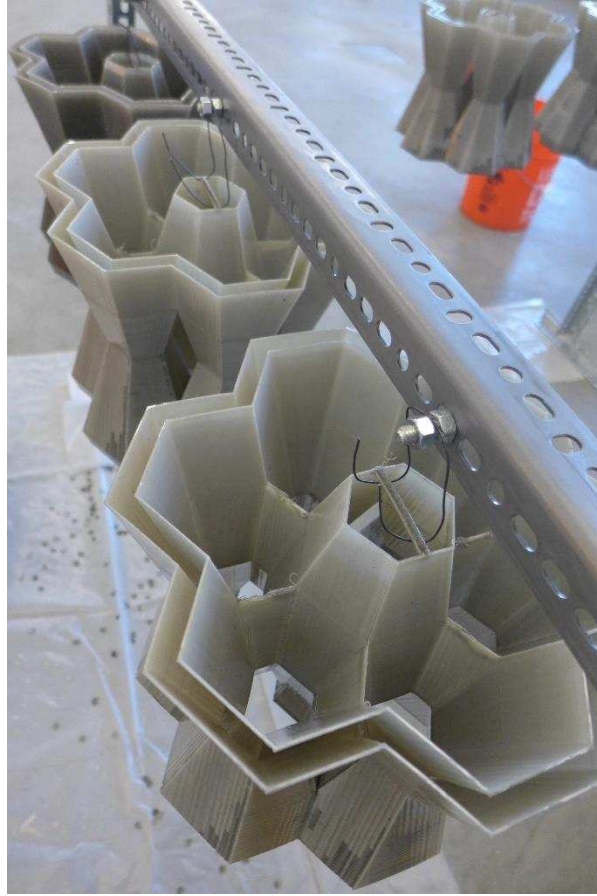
Full hexagon design demonstrating initial double wall design. Parts are hanging to dry after a TFAD coating.
